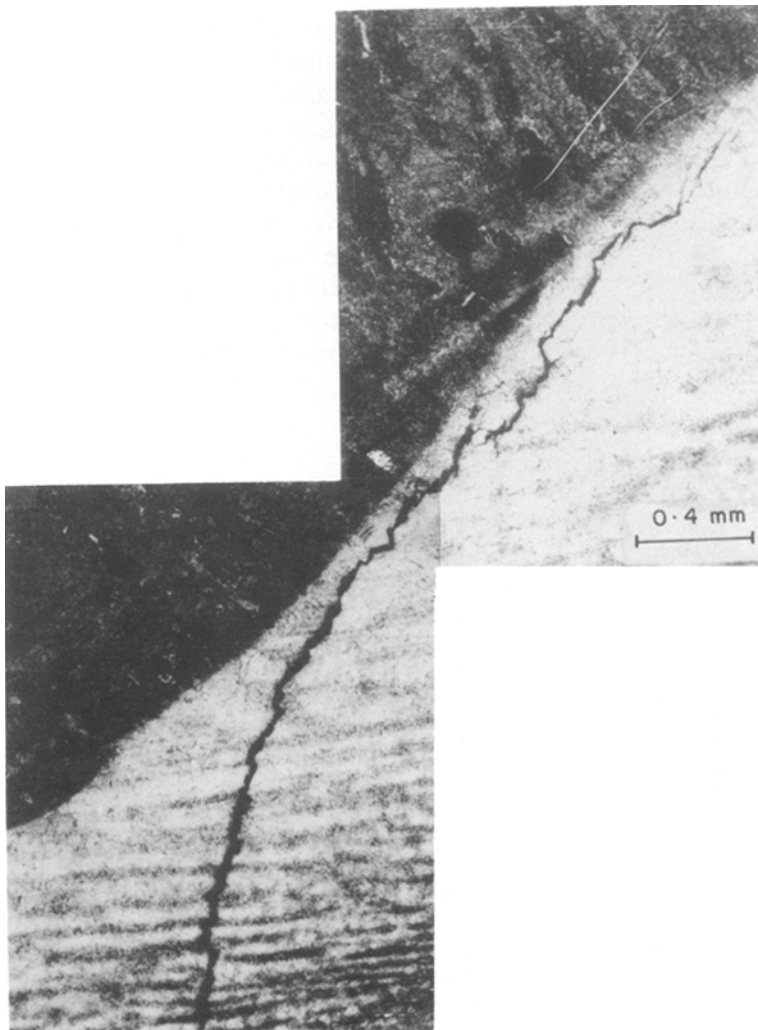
Fractographs depicting the intergranular cracking found in the HAZ of the weld specimens. Spots of transgranular cracking are also observed.
